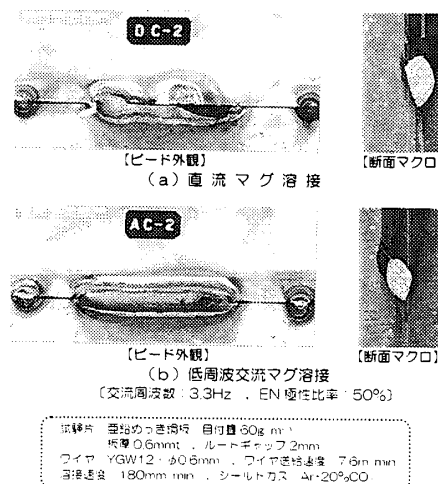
Lap joint welding for extremely thin steel plate
